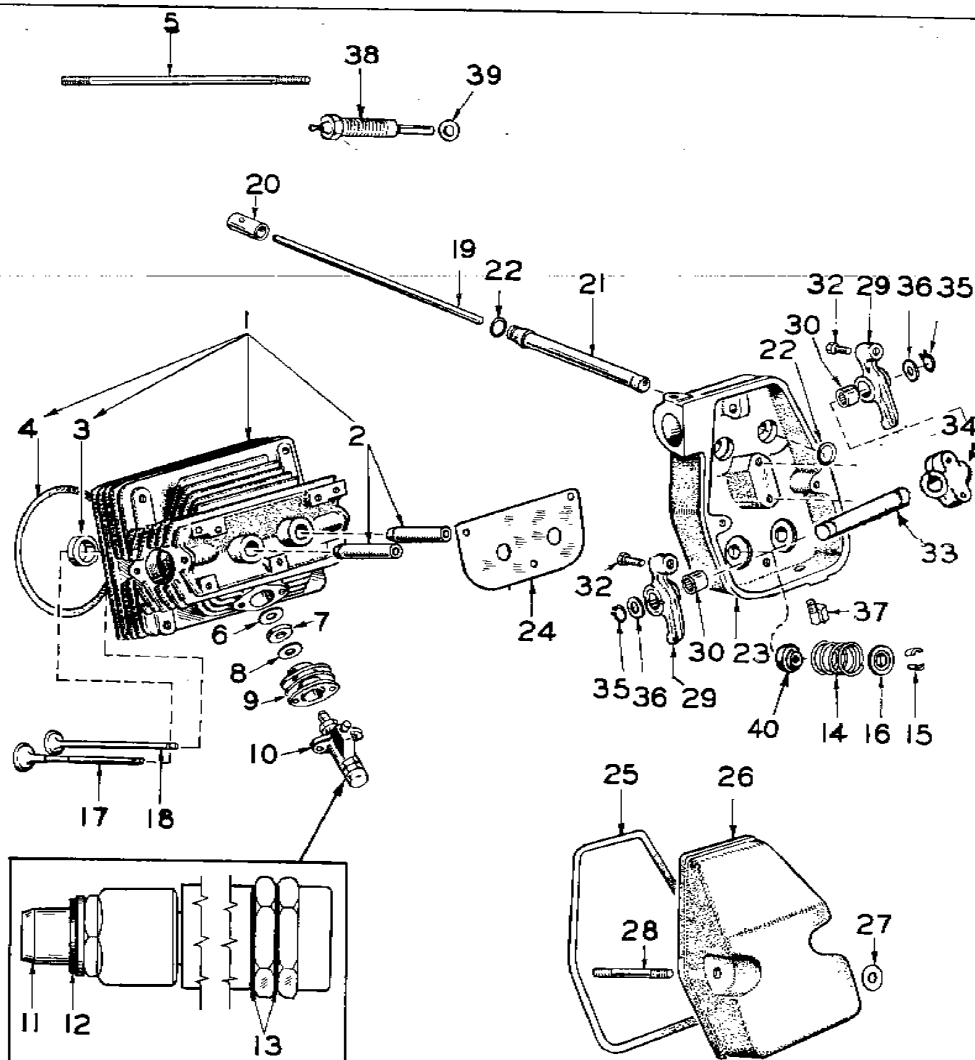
CYLINDER HEAD, VALVE AND ROCKER BOX GROUP
